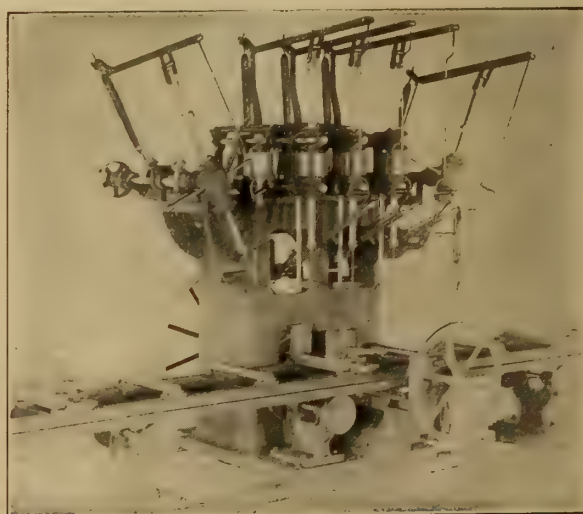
6 SPINDLE COMBINATION BORING MACHINE, No. 321.
